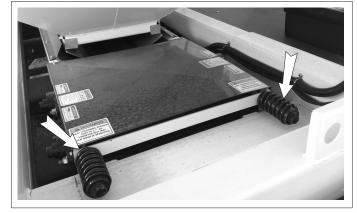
CONVEYOR ALIGNMENT (TYPICAL)
